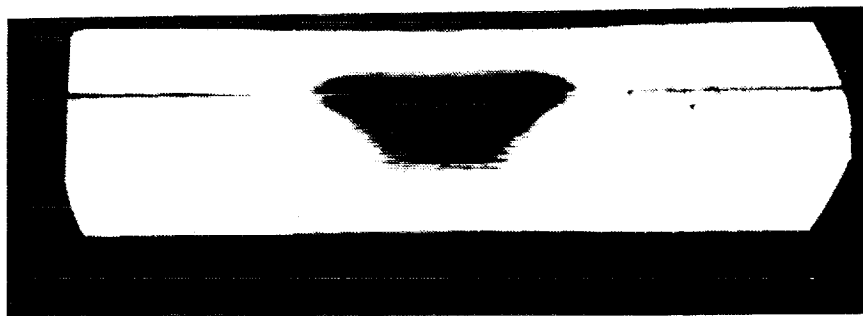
Undersized Spot Weld in 0.090" 2090-T62 joined to 0.190" 2090-T83 Al-Li.
